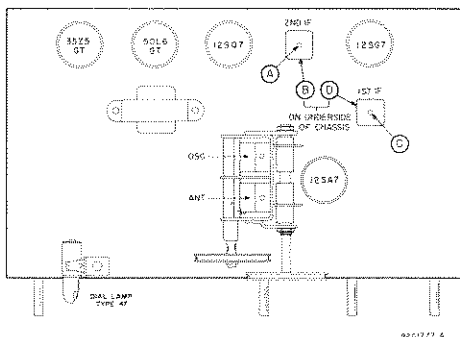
Top View of Chassis Showing Location of Alignment Adjustments, Tubes and Dial Lamp.
